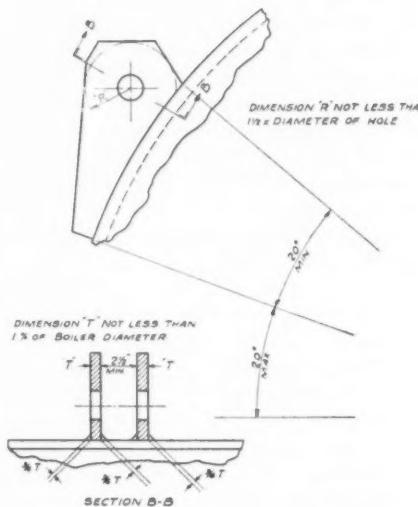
WELDED BRACKET CONNECTION FOR HORIZONTAL-RETURN TUBULAR BOILER
